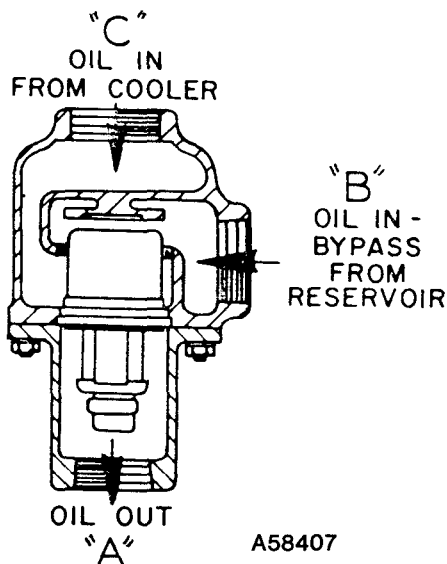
THERMOSTATIC MIXING VALVE
